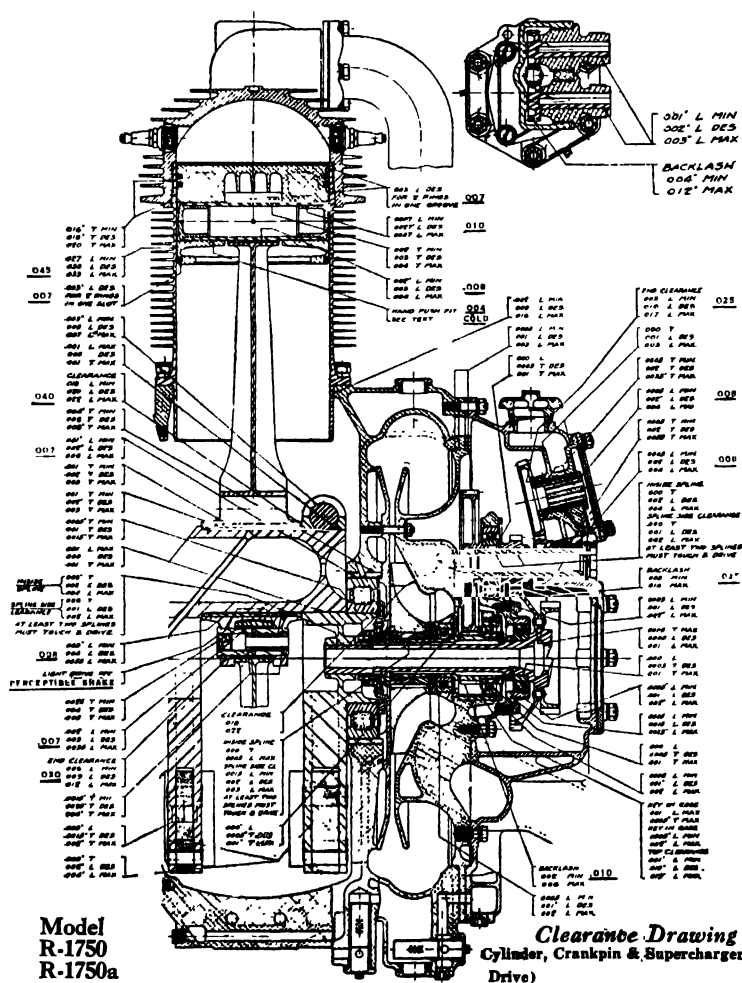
Clearance Drawing Showing Wright "Cyclone" Cylinder, Crankpin and Supercharger Drive.
